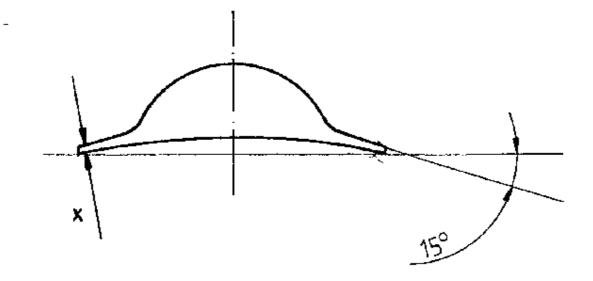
Cross-section of the stock combustion chamber in TDC position (optimum dimension X: 0.75 – 0.9 mm or 0.03 – 0.035 inch)
